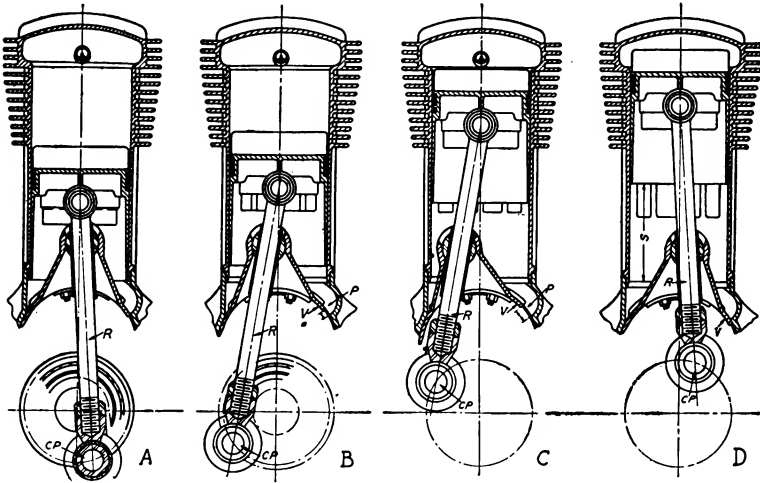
Sketches Indicating Operation of Frederickson Sliding Port Valve
